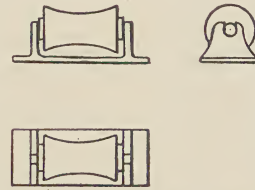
Front and End Elevations and Plan of Roller Stool for Pipes.
